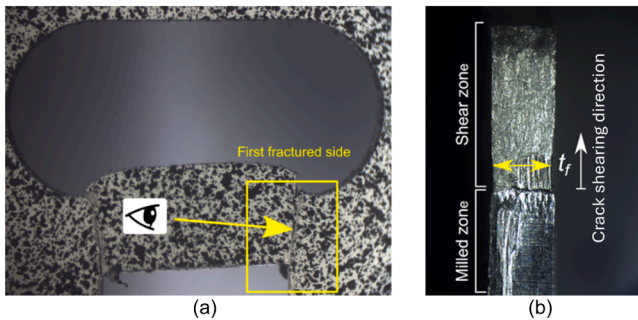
Fracture strains: (a) fracture side evaluated and (b) thickness at fracture.
